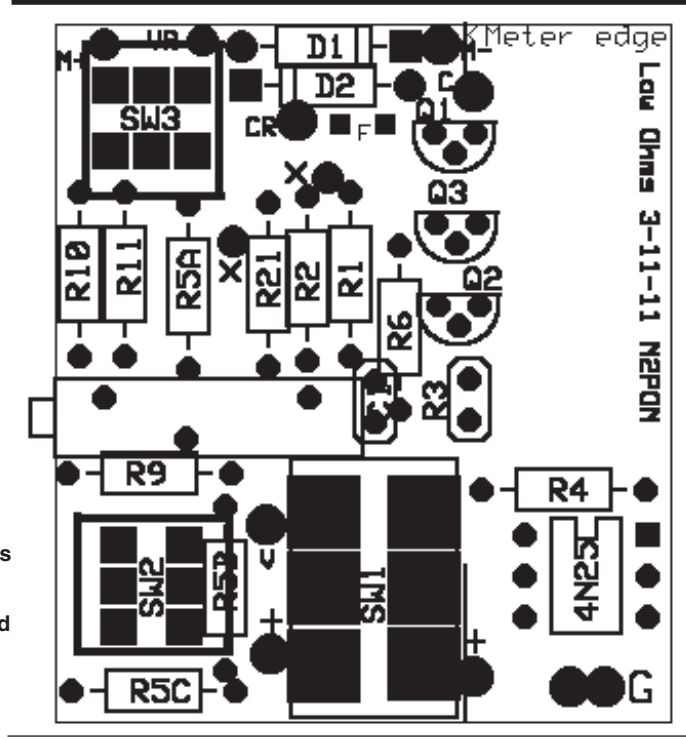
This is the parts placement overlay created with the ExpressPCB software.
